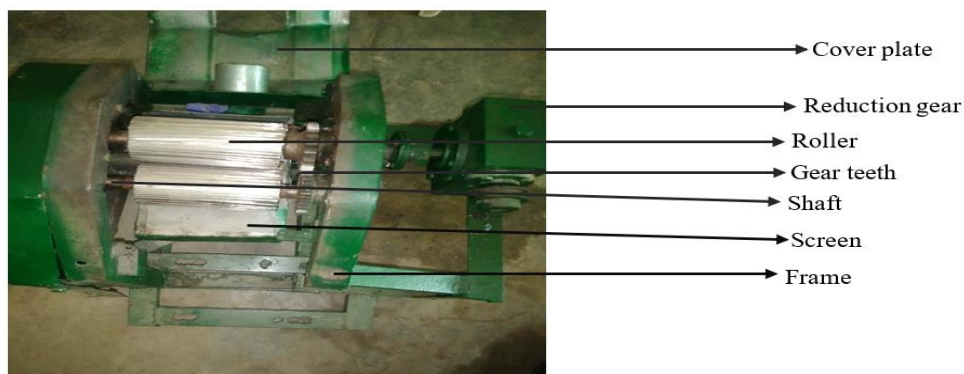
Pictorial view of the sugarcane juice extractor showing component parts
